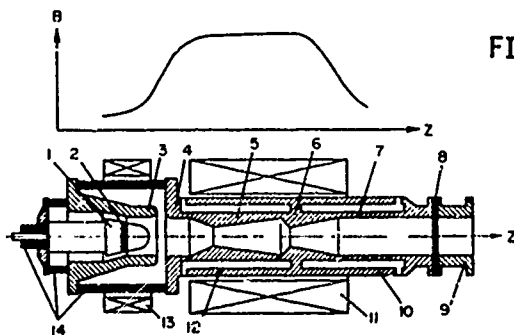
OUTLINE DRAWING OF SOVIET GYROTRON PROTOTYPE.
